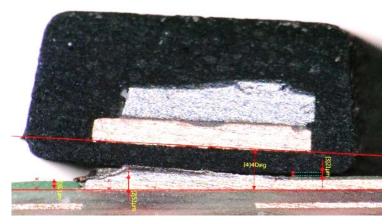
cross-section of tilted SOD. Mention the package sitting closely on the solder mask of the side connection of the pad.
